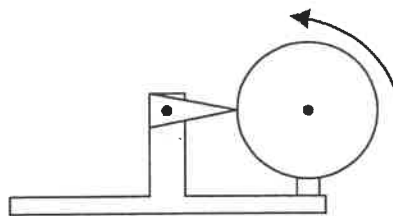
Turning operation with a fixed tool and rotating workpiece.
